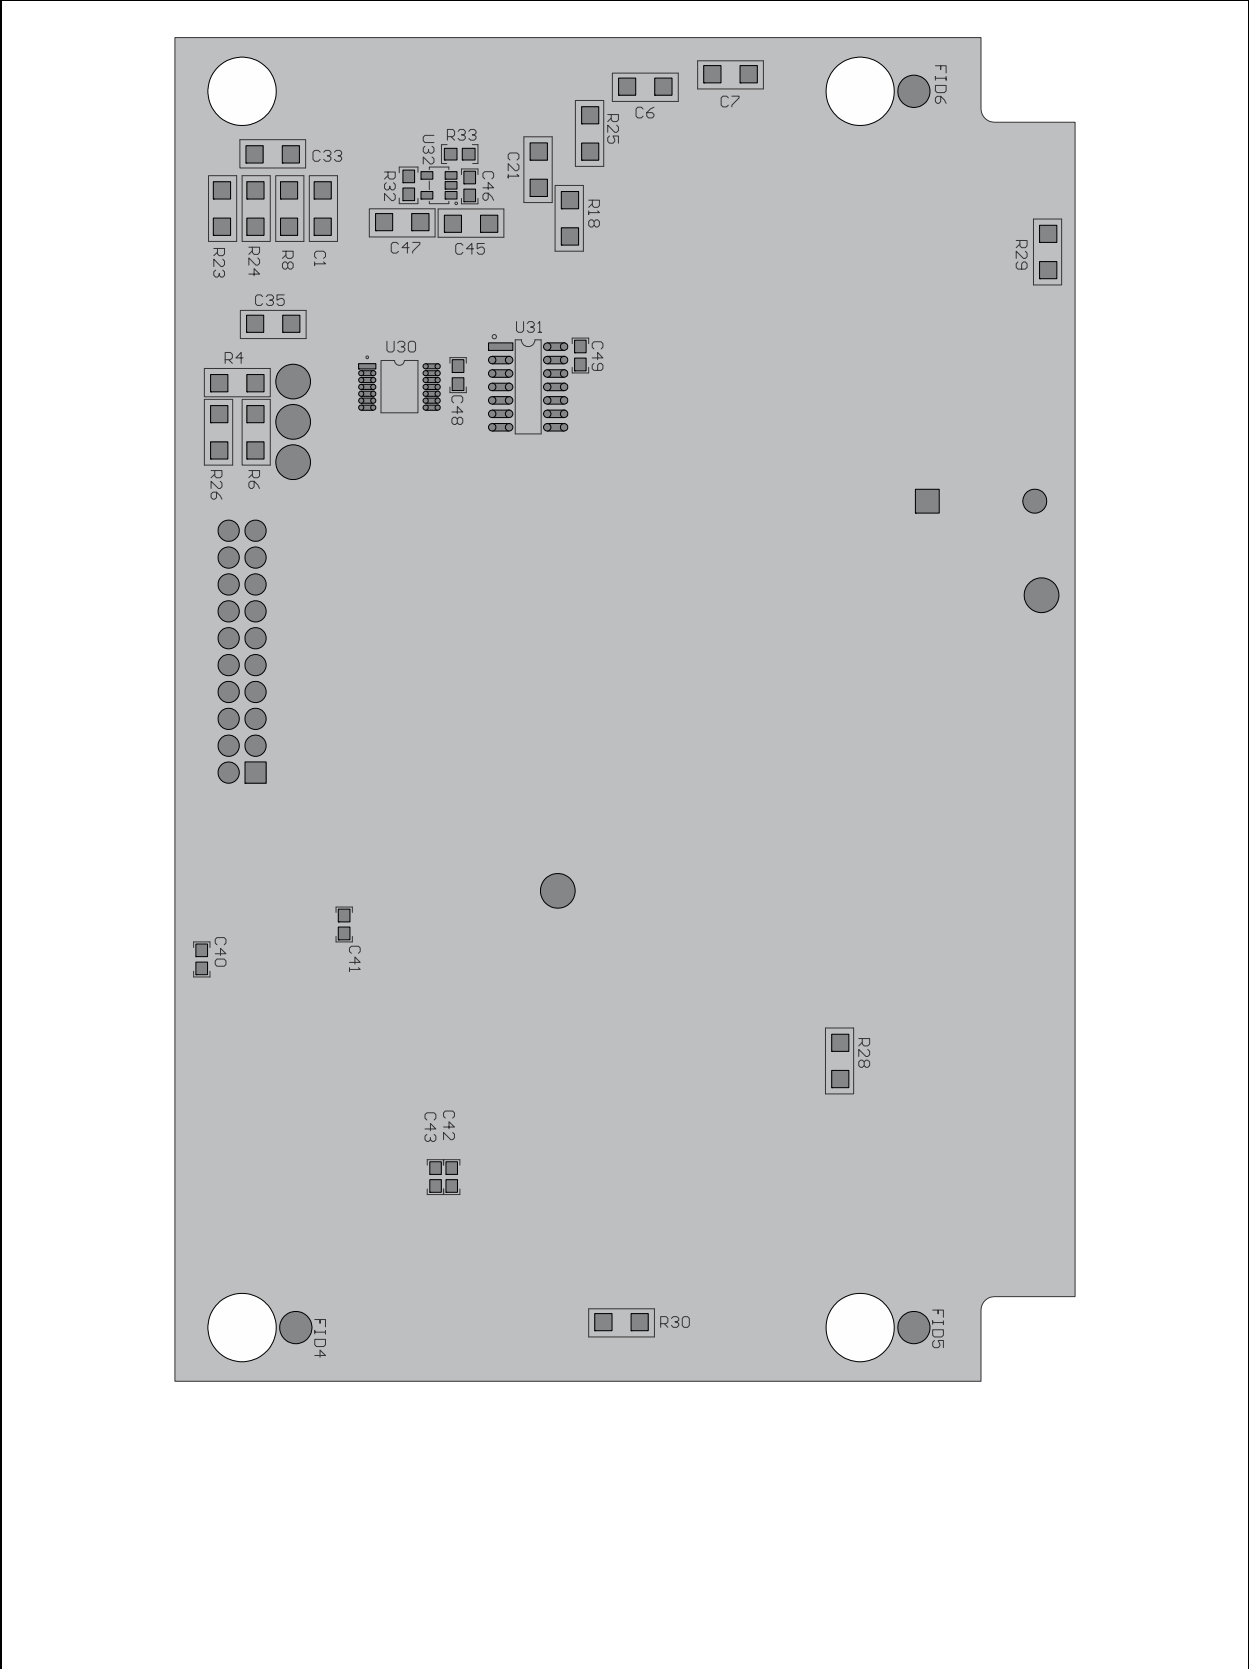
ALE Board Component Locations 2 of 2 (738215 Rev. B)
